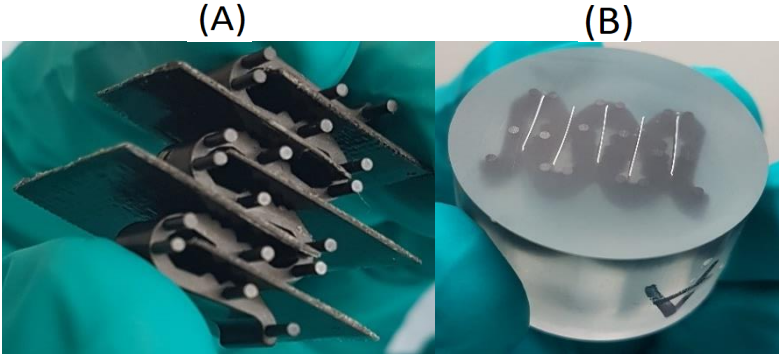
(A) Pre-embedding clamped samples. (B) Sample cross-section after grinding.
